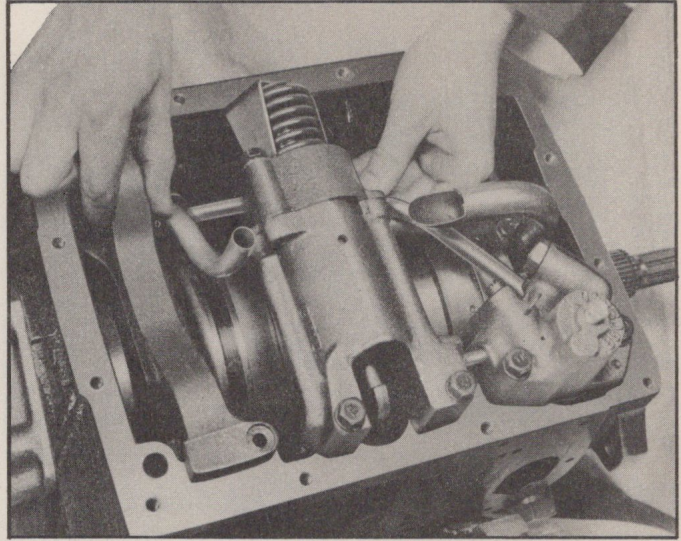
Removing Rear Oil Pump Discharge Pipe
